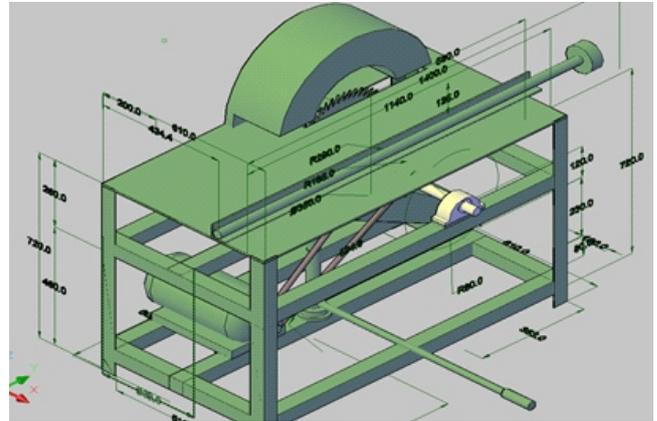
Pictorial View of the Improved Design Plank Sawing Machine
